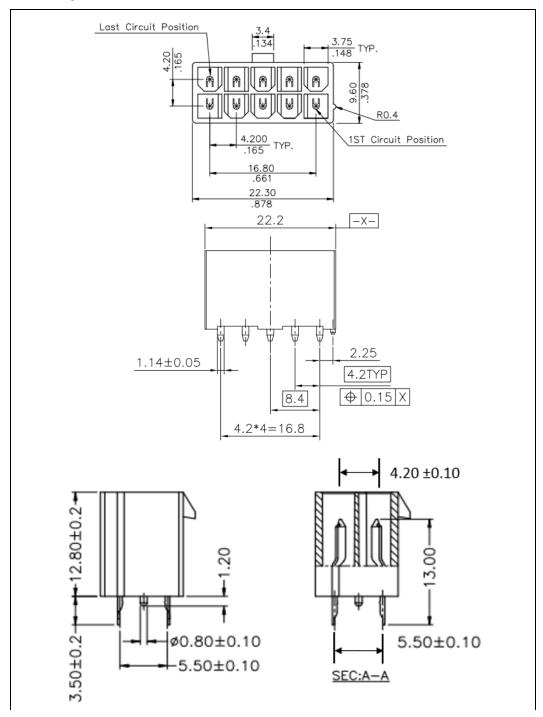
4.2 mm Power Header 10 pin Main Power – Motherboard Connector, PC Board Layout with Dimensions
